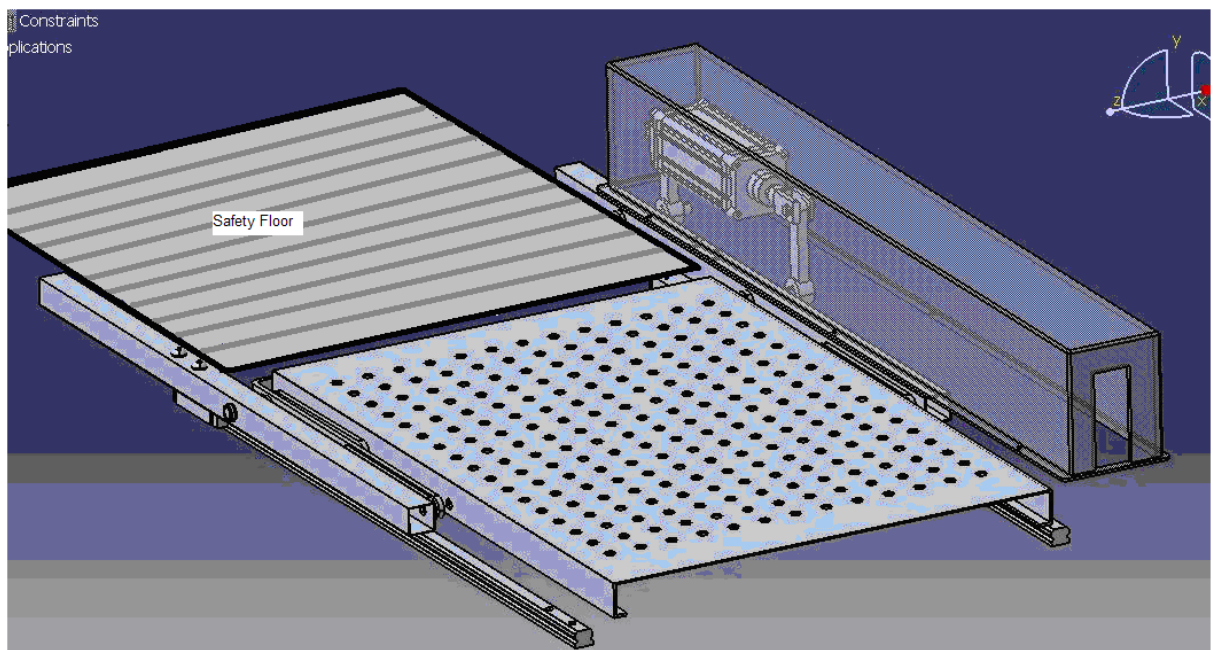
18 Platform and Safety Floor Connection – 3D CATIA model
